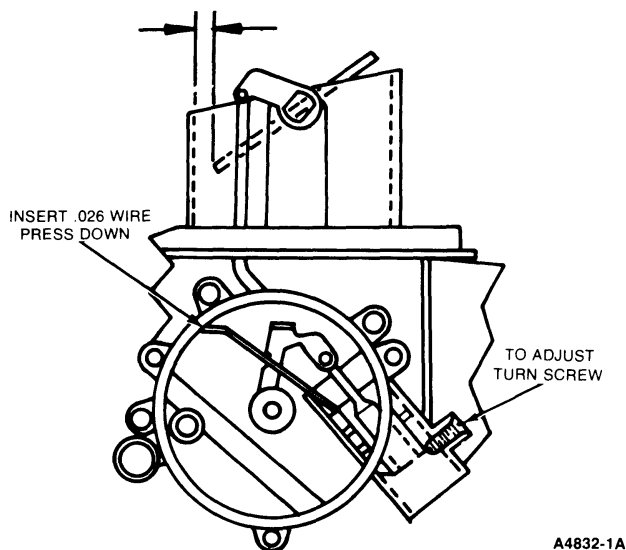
Choke Plate Pulldown—Holley 4160 C-4V (Hot Air Only) Carburetor
